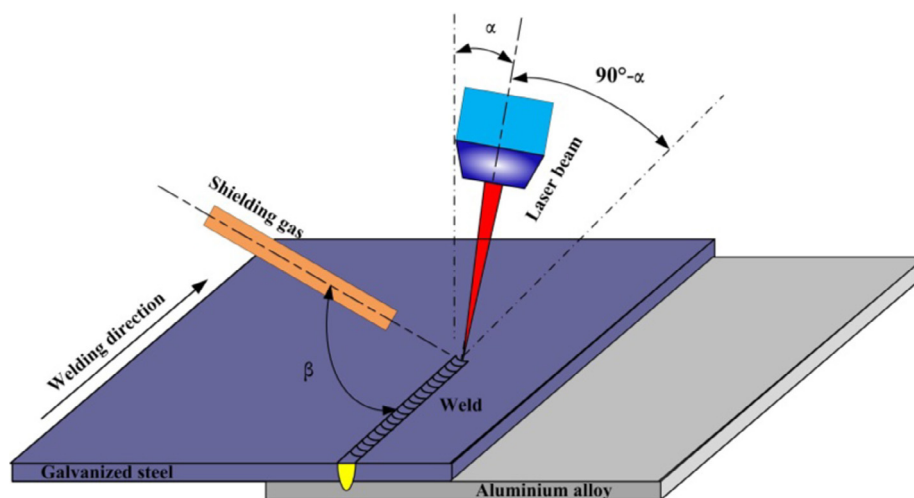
Schematic diagram of laser welding steel and aluminum.
